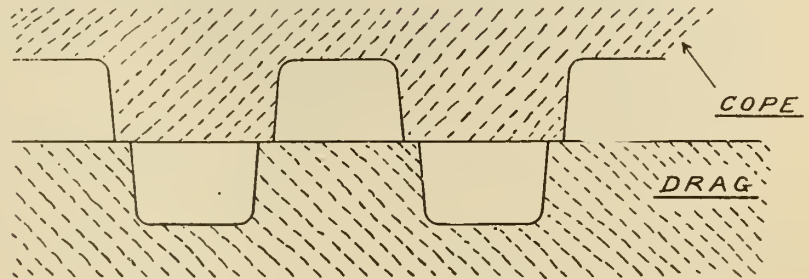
CASTINGS STAGGERED IN DRAG AND COPE
